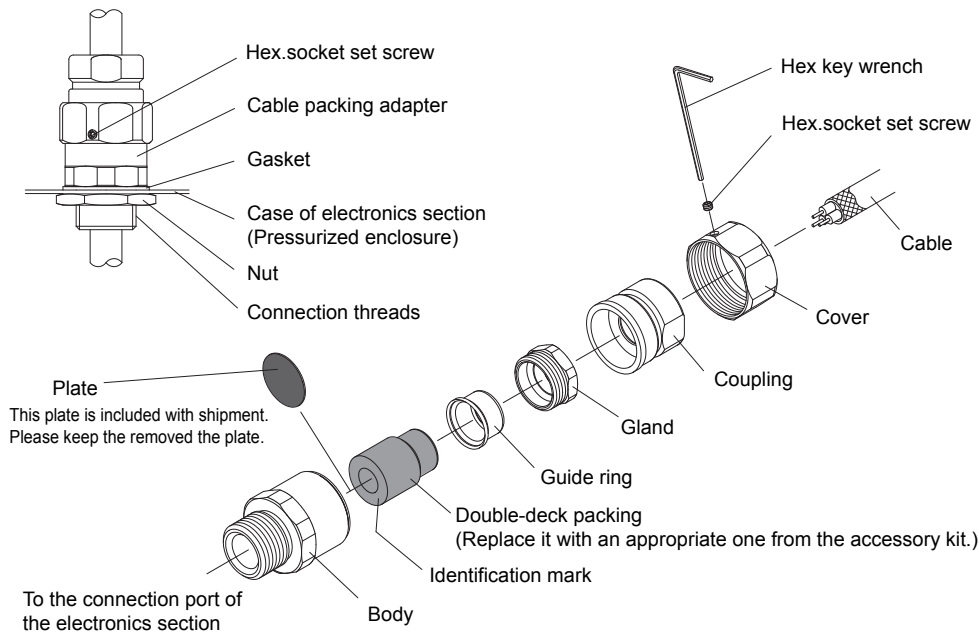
Procedure for mounting a cable packing adapter for the electronics section
